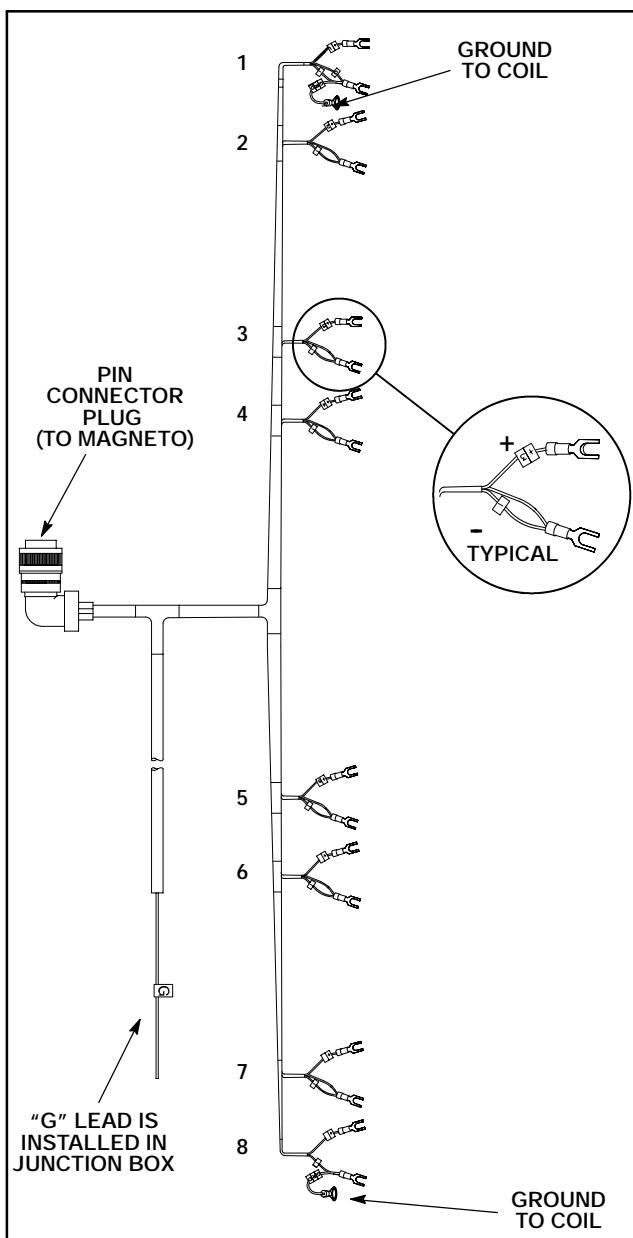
Eight Cylinder Ignition Module Harness
